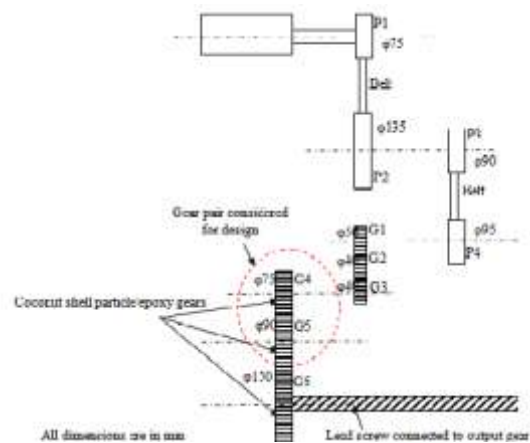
Transmission system of PL-4 Lathe (Kirloskar make)
